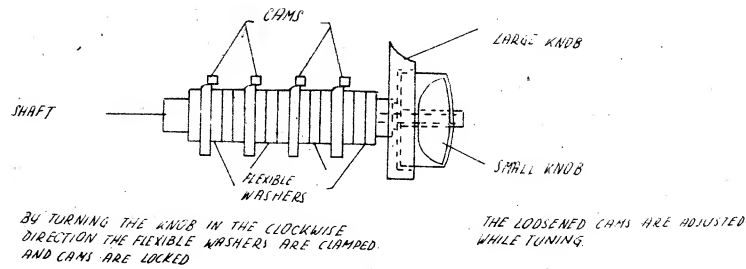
13. Assembly of the lever mechanism shaft.
